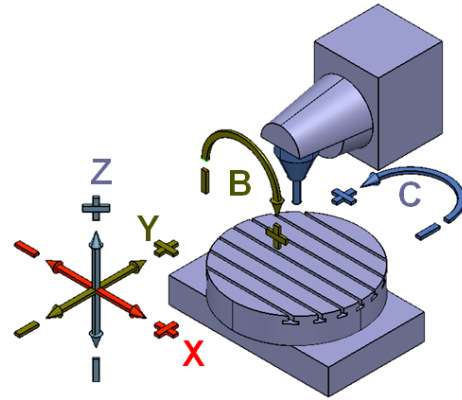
5D machine structure with tool rotation and workpiece rotation
